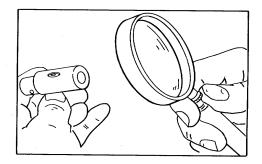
Examining Sealing Surfaces with a Magnifying Glass
